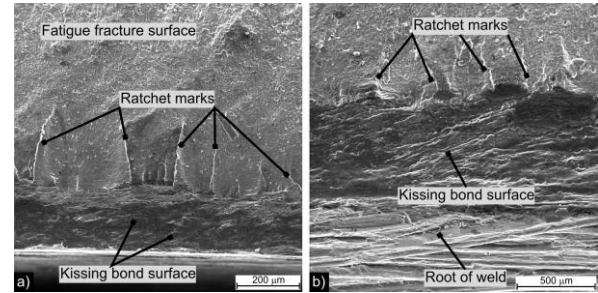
Fatigue crack initiation from the KB flaw notch observed by electron microscopy: a) fracture surface top view; b) angled view.
